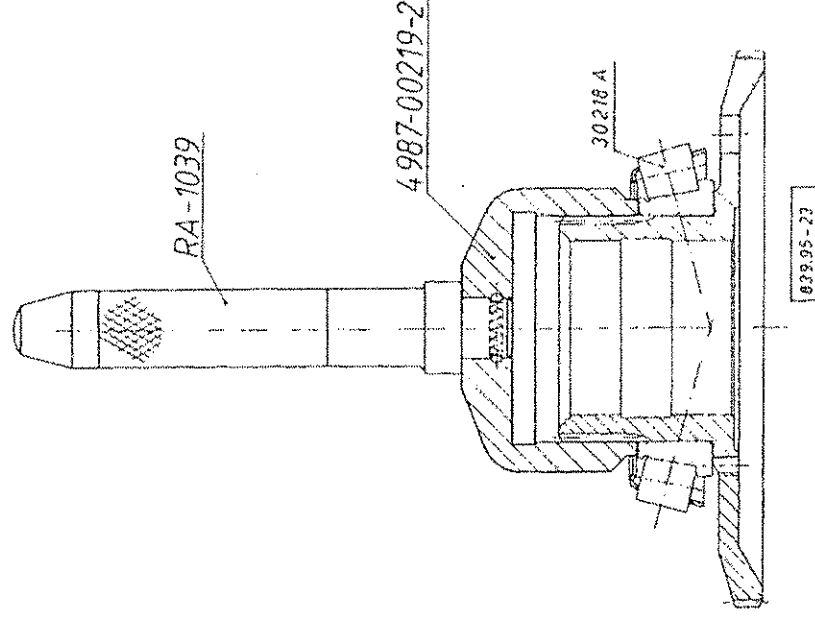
PRESSING ON THE TAPER ROLLER BEARING INNER RACE
